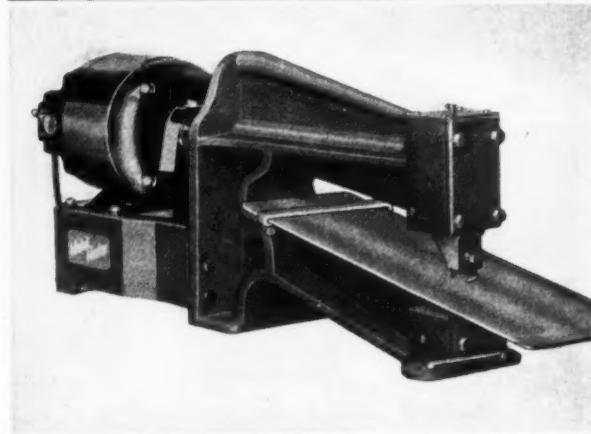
Glascock Jig Shear Especially Suitable for Use in Model Making
